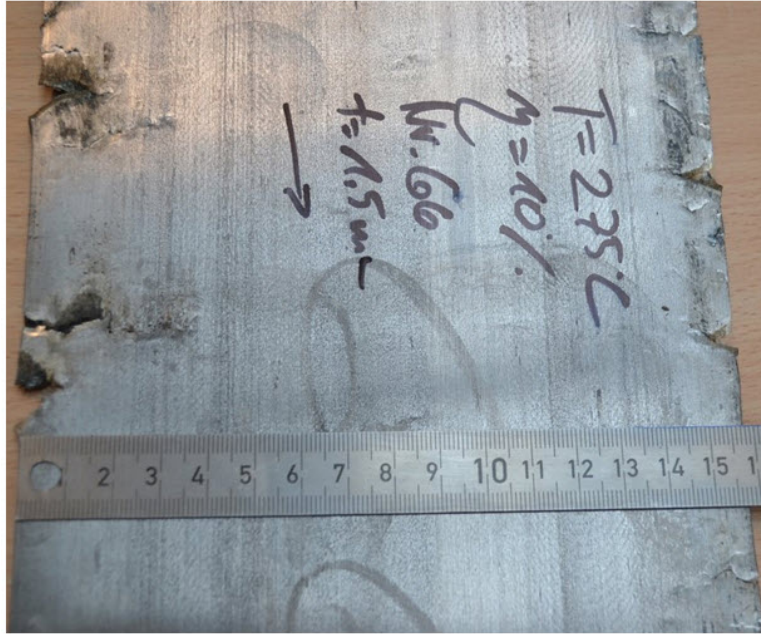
Enlarged view of the edge cracks for sheet 66; typically, damage was limited with crack lengths of about 10 to 25 mm
